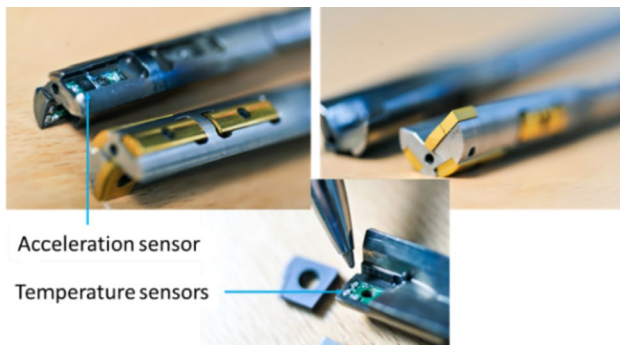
Sensor-integrated single-lip deep hole drilling tool for acceleration and temperature measurement
